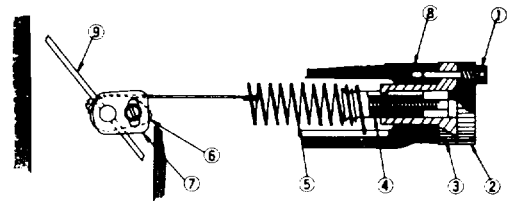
Mounting Cam Spring and Adjusting Sleeve
